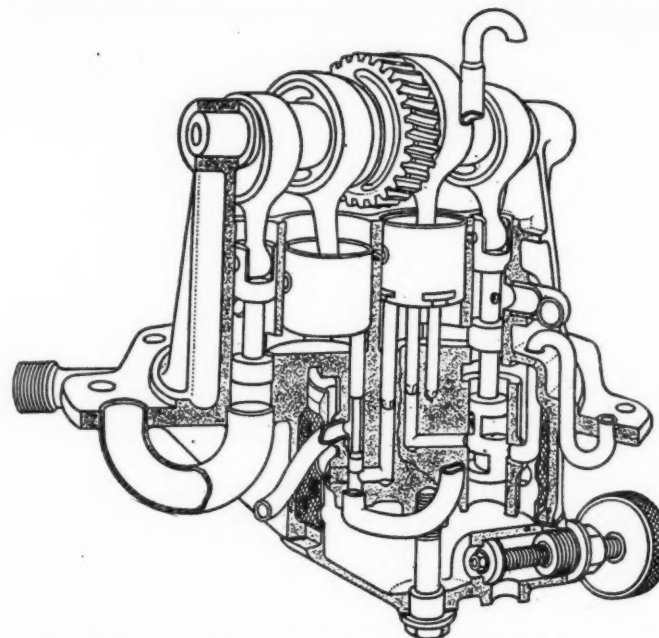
Details of the oil pump on the Mercedes 260-hp. engine
